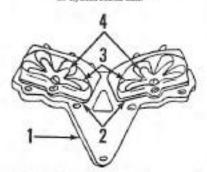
Rear view of inlet manifold showing inlet reed valve boxes. Reed petals (3) and reed stops (4) must be centered over holes in box (2).
